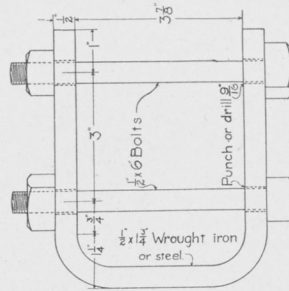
Clevis for attaching Scaffold Hoisting Device to Posts.
